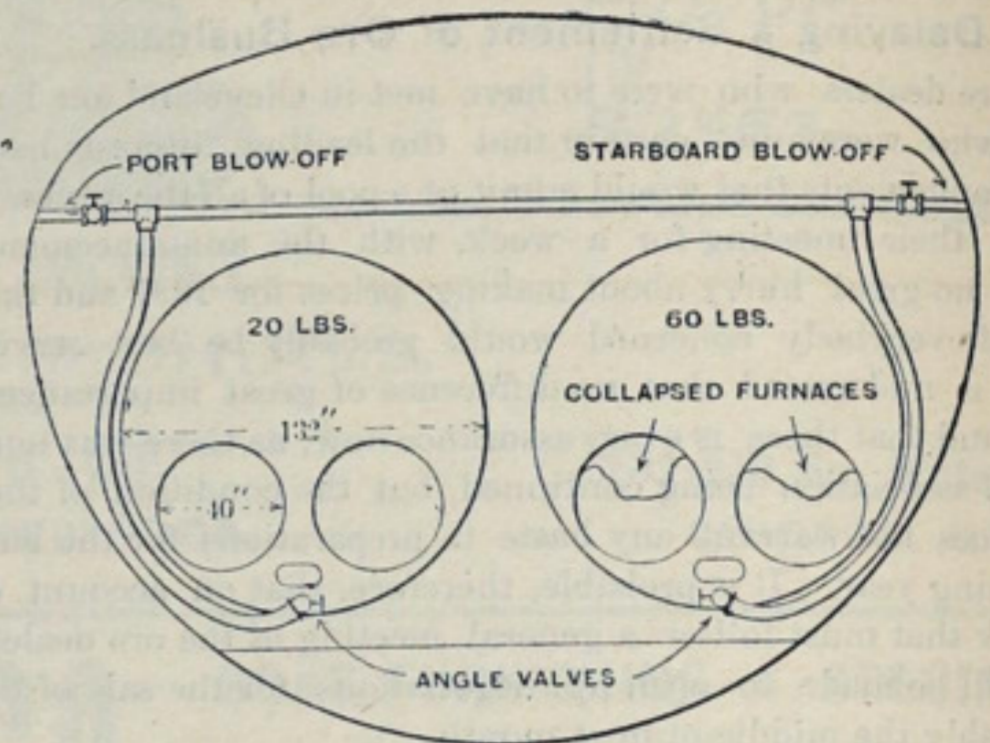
CROSS SECTION SHOWING ARRANGEMENT OF BLOW PIPES.
